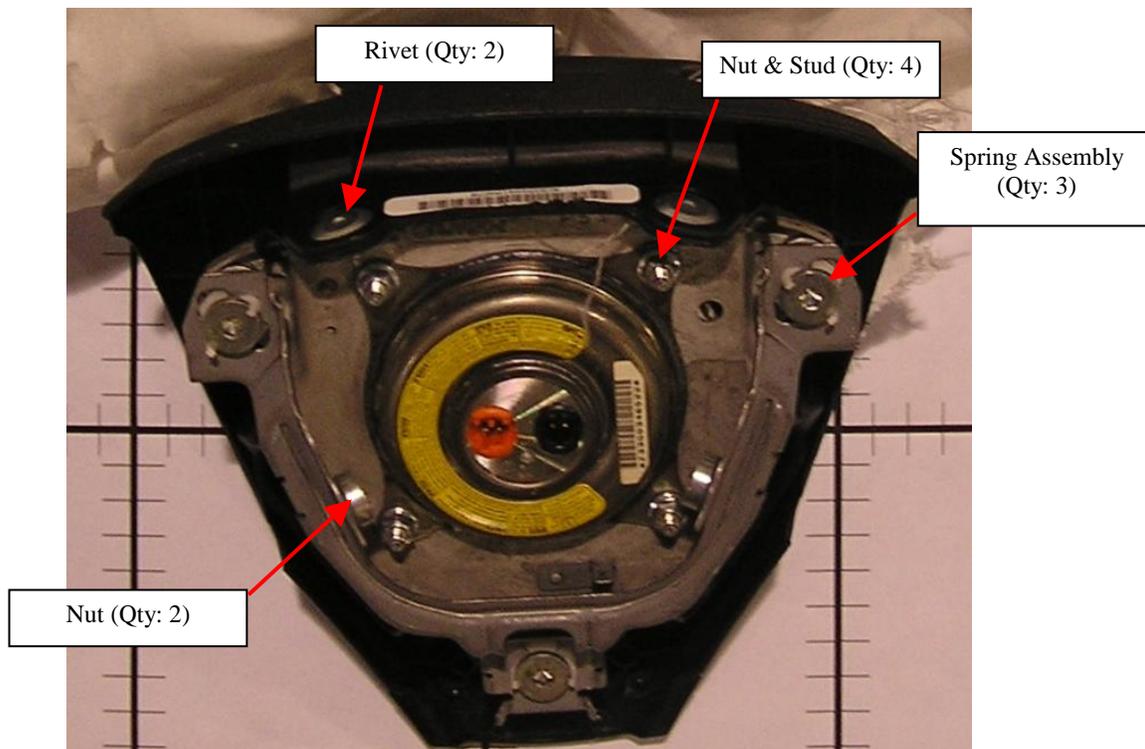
Toyota Venza Steering Wheel Airbag Assembly, showing various fasteners
